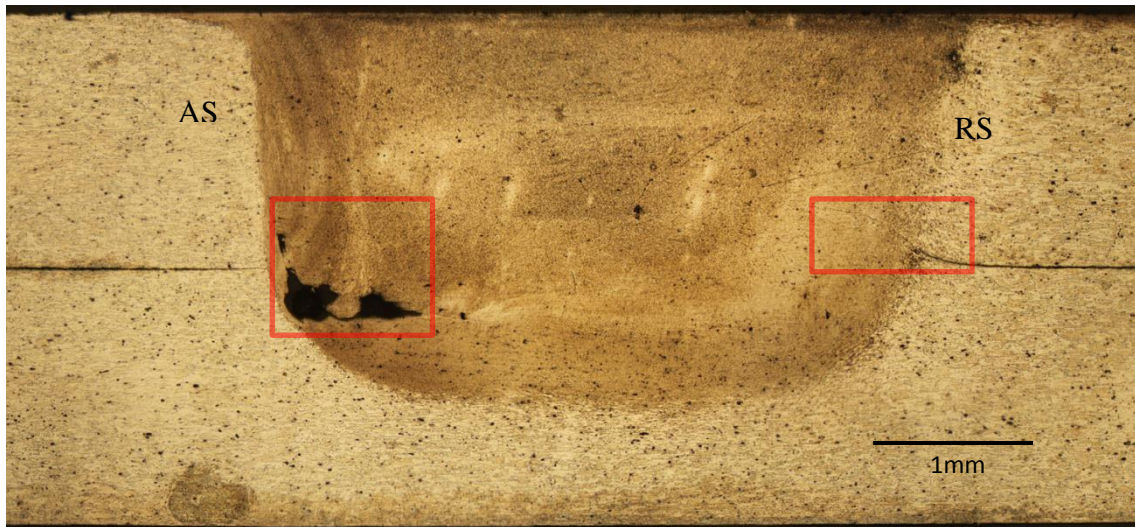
Metallographic picture of SSFSW #3760B welding sheet cross section at -1500 rpm, 8.47 mm/sec, 9.79 kN tool 1(RH)
